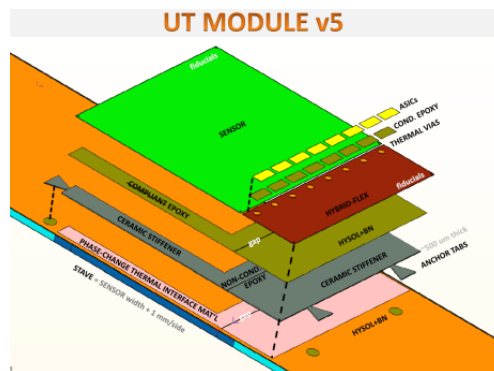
“Exploded” view of a module, showing the support and thermal contacts for a sensor and its readout ASICs.
